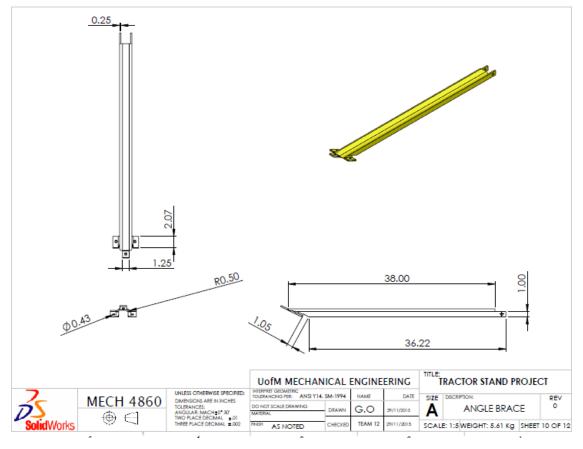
Drawing of final angle brace design, with dimensions in inches.
